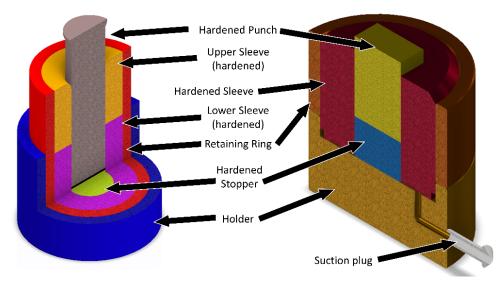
Cut view of the used die presses. On the left: Circular press tool designed by Alexander Schmitz-Wunderlich and Alexander Schug using industrial cutting bushes within their maser thesis. On the right: Rectangular press tools designed by Friedrich Waag.
